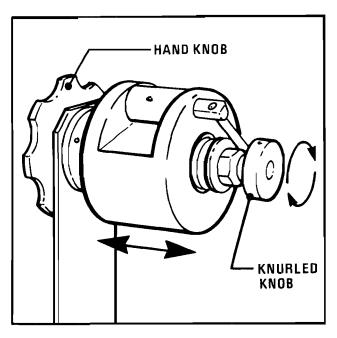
TAPE DRUM FRICTION BRAKE
